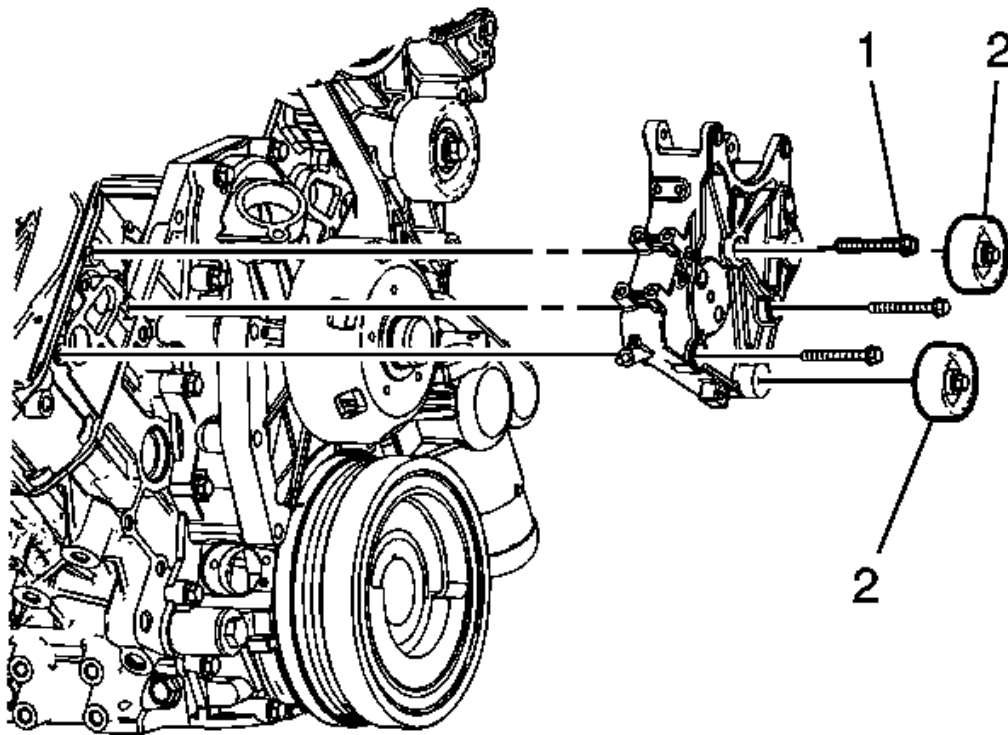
View Of Generator Bracket Bolts & Idler Pulley Bolts
